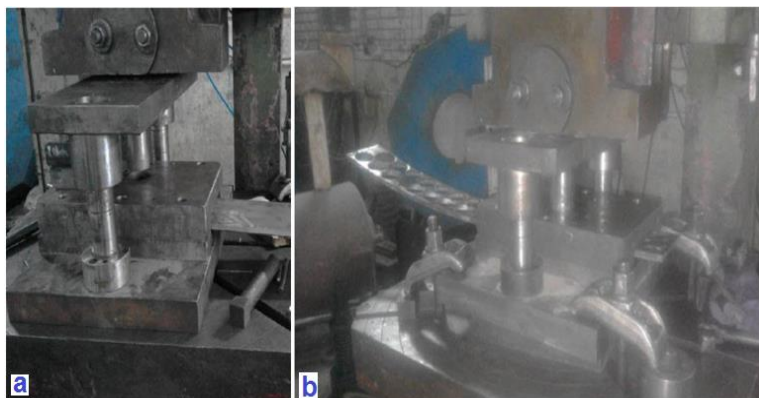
(a) The die is being tested with Three Punches( 9, 15, and 21% clearance) (b) The die is undergoing initial testing and passing the sheet
